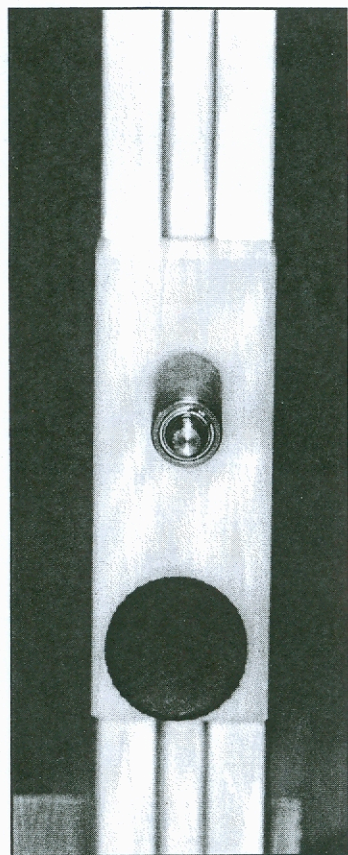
(LEFT) — Tooling for Front Weight measurement, showing roller bearing and thumbscrew for adjusting height. Photo 2 (ABOVE) — Front Weight measuring setup.
